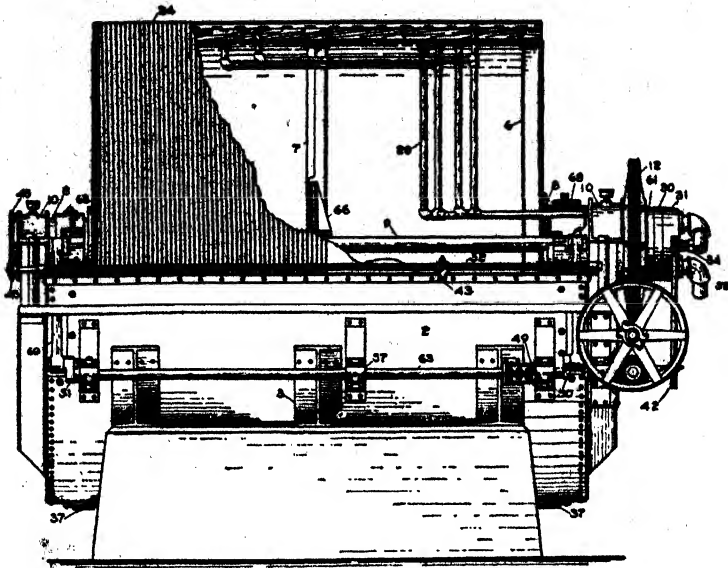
Showing the essential parts of the Oliver Filter: 1a, Closed steel drum head; 2, Steel filter tank; 3, Tank feet; 6, Drum rims; 7, Drum arms; 8, Drive trunnion; 8a, Rear trunnion; 10, Main bearing (drive end); 10a, Main bearing (rear end); 12, Worm wheel; 18a, Bevel pinion; 24, Wire winding; 28, Vacuum and air pipes; 30, Renewable valve seat; 31, Automatic valve; 32, Vacuum connections; 34, Valve stem; 42, Valve adjusting rod; 42a, Valve adjusting bracket; 43, Wiring carriage; 45, Wiring sprocket; 45a, Feed screw sprocket; 46, Wiring feed screw; 51, Agitator crank; 56, Spur gear; 56a, Ratchet spur gear; 56b, Spur gear flange; 57a, Crankshaft bearing; 61, Valve pipe plate; 62, Drum manhole; 63, Crankshaft; 66, Center spider; 69, Connecting rod; 75, Feed connection; 76, Drain connection; 78, Pinion shaft; 79, Wiring carriage guide; 83, Automatic valve nipple; 85, Agitator crank pin; 88, Stave hook bolt; 89, Ratchet lever. (Illustration by Oliver Continuous Filter Company.)
